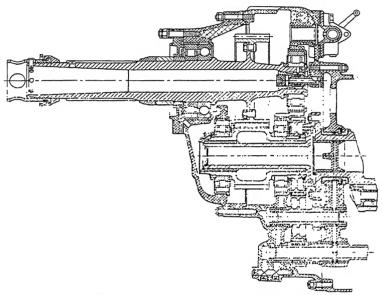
Single reduction gear used on geared models of ranger inverted V-12 engine. Gears are of the herringbone type.
